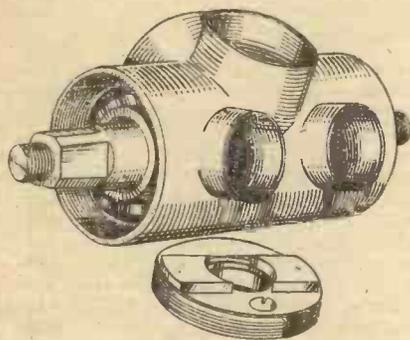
General view of a bottom bracket with covers which screw into the housing.
